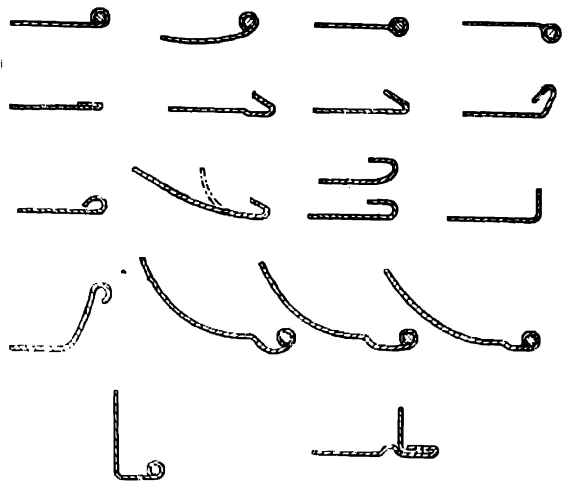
Some of the shapes done on the wiring and edging machine.
